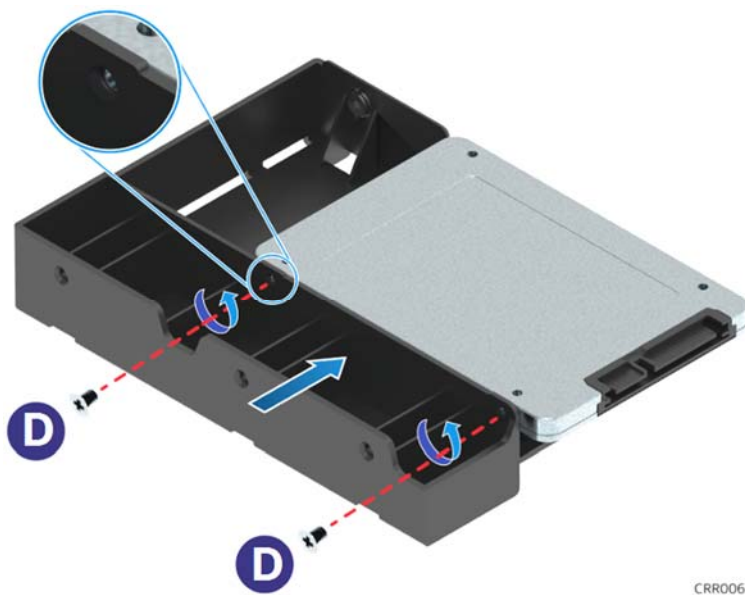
3.5" Drive Carrier to 2.5" SSD Bracket – Mount SSD to Bracket
